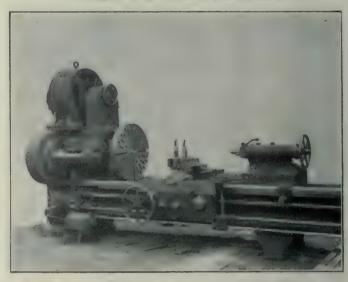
Double Front Geared High-speed Engine Lathe. John Bertram & Sons Co., Dundas.
